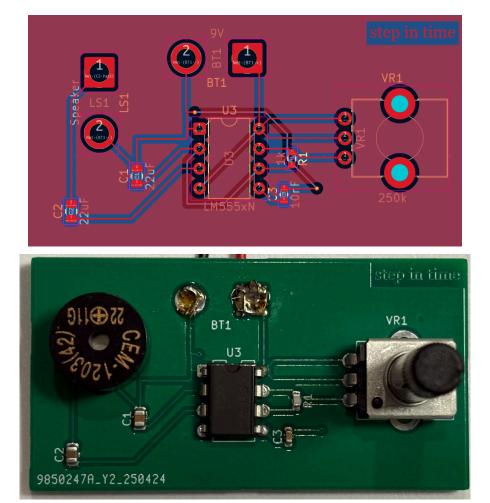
Custom metronome circuit PCB schematic (top) and assembled PCB (bottom)
